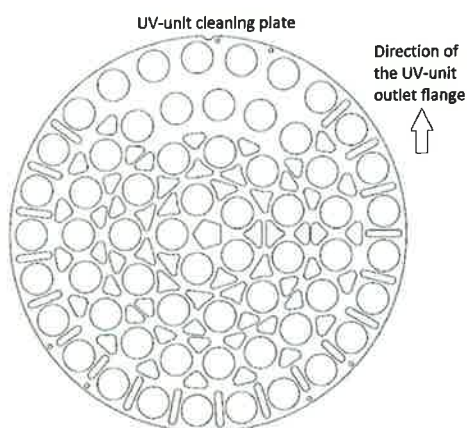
Design of the mechanical cleaning plate / hydraulic optimizer.
